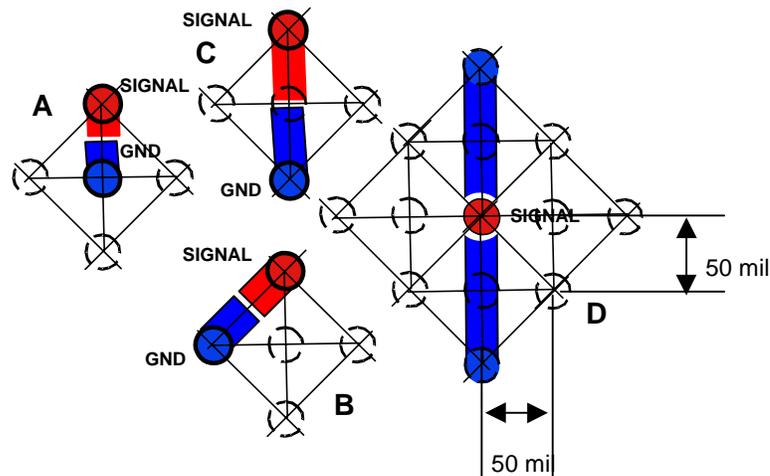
Top L Fixture probing pad design (50 mil grid pattern)
